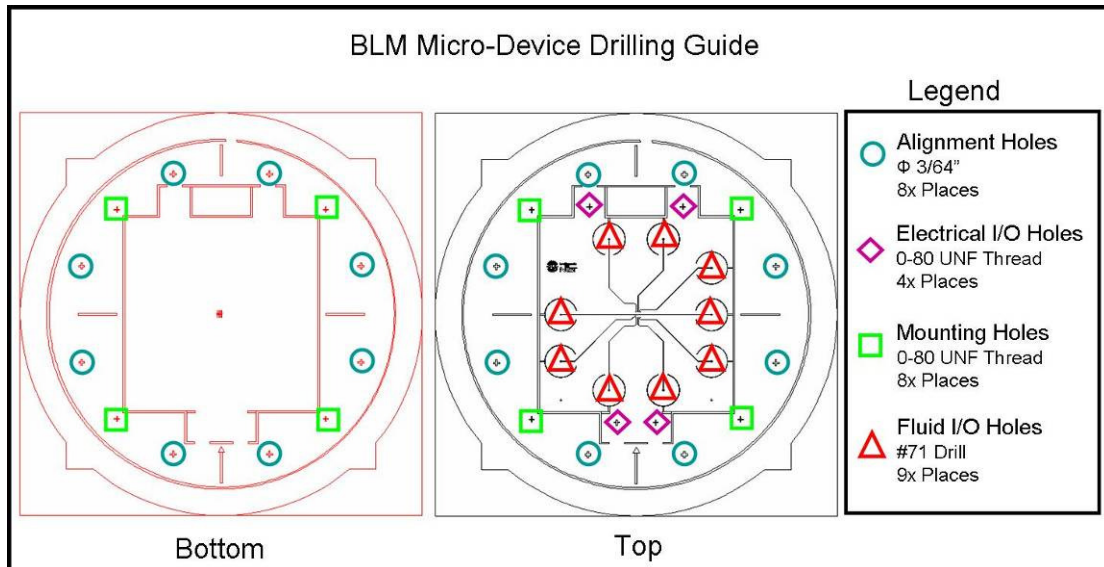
Location and identification of holes drilled in the top and bottom PC wafers. Note, alignment holes are drilled later during device assembly so actual number of alignment holes is half of number shown.
